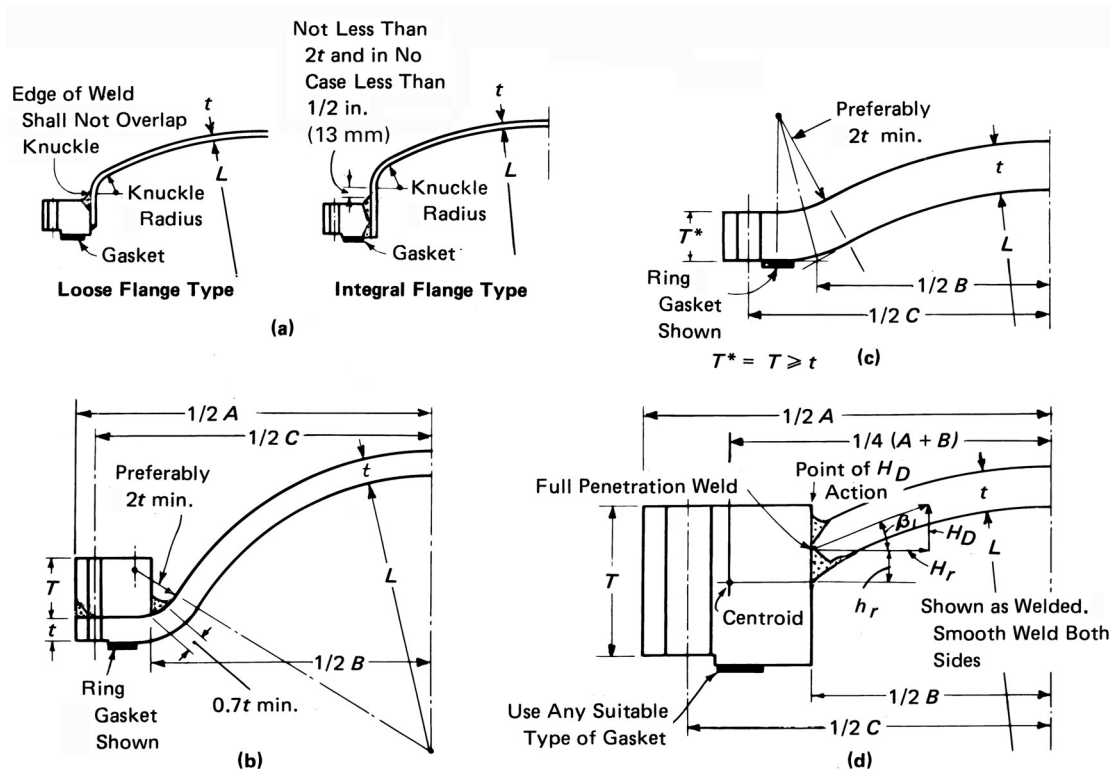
SPHERICALLY DISHED COVERS WITH BOLTING FLANGES
